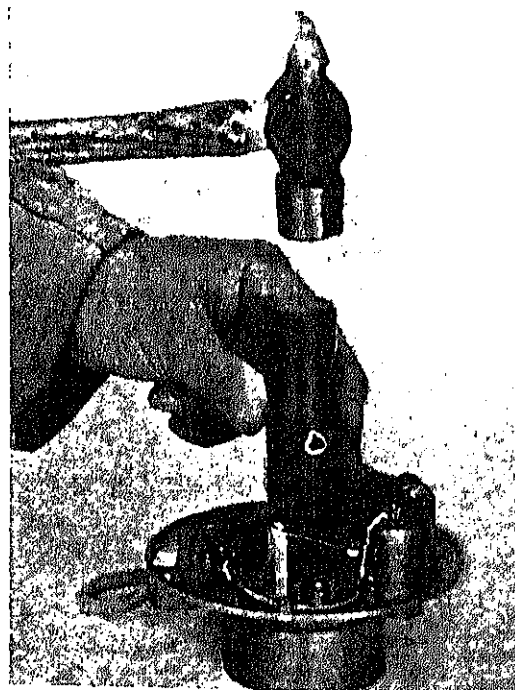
Removing and fitting the sealing ring of the stator by means of mandrel 9201 0244. Be careful not to damage the contact breaker arm.
